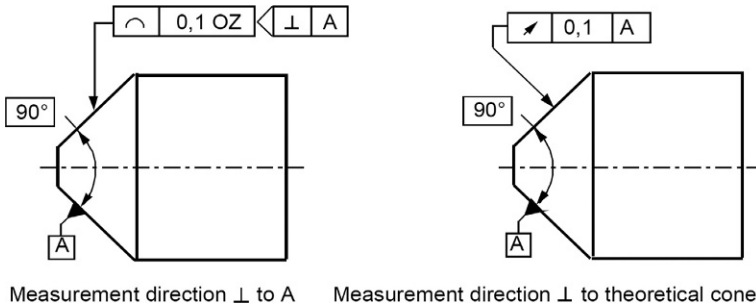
Tolerancing of roundness with the tolerance width perpendicular to the feature axis and perpendicular to the ideal surface, ISO 1101
